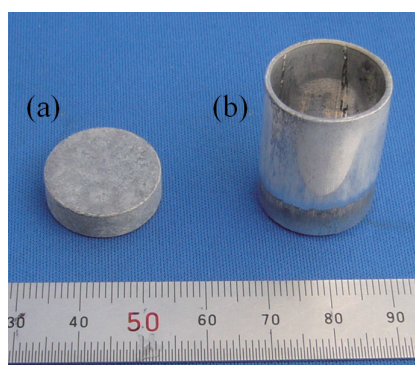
Appearance of (a) billet and (b) extruded cup.
